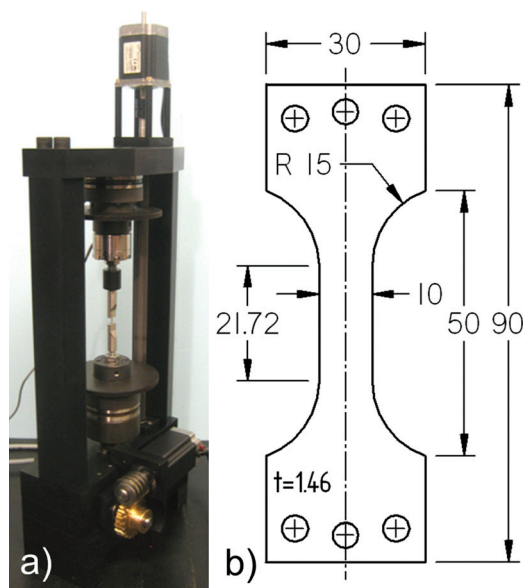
(Color online) (a) Portable loading system. (b) Specimen dimensions in mm.
